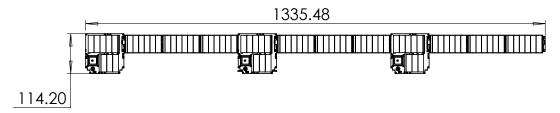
ThinSat 3T Spacecraft, Dimensions in mm
